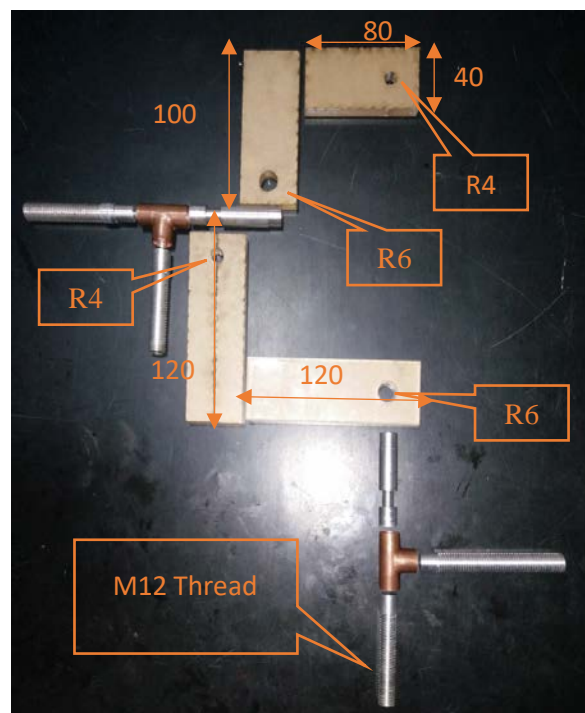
Parts of Prototype I (All Dimensions in mm)
